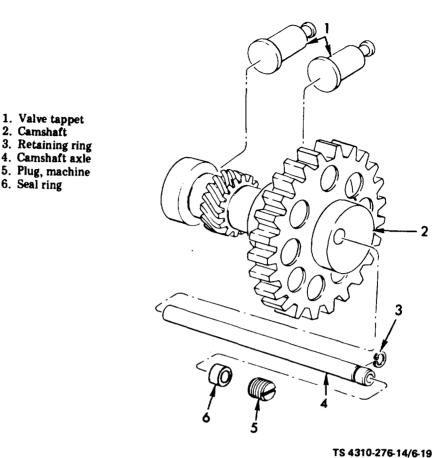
Camshaft and Value Tappets, Disassembly and Reassembly
